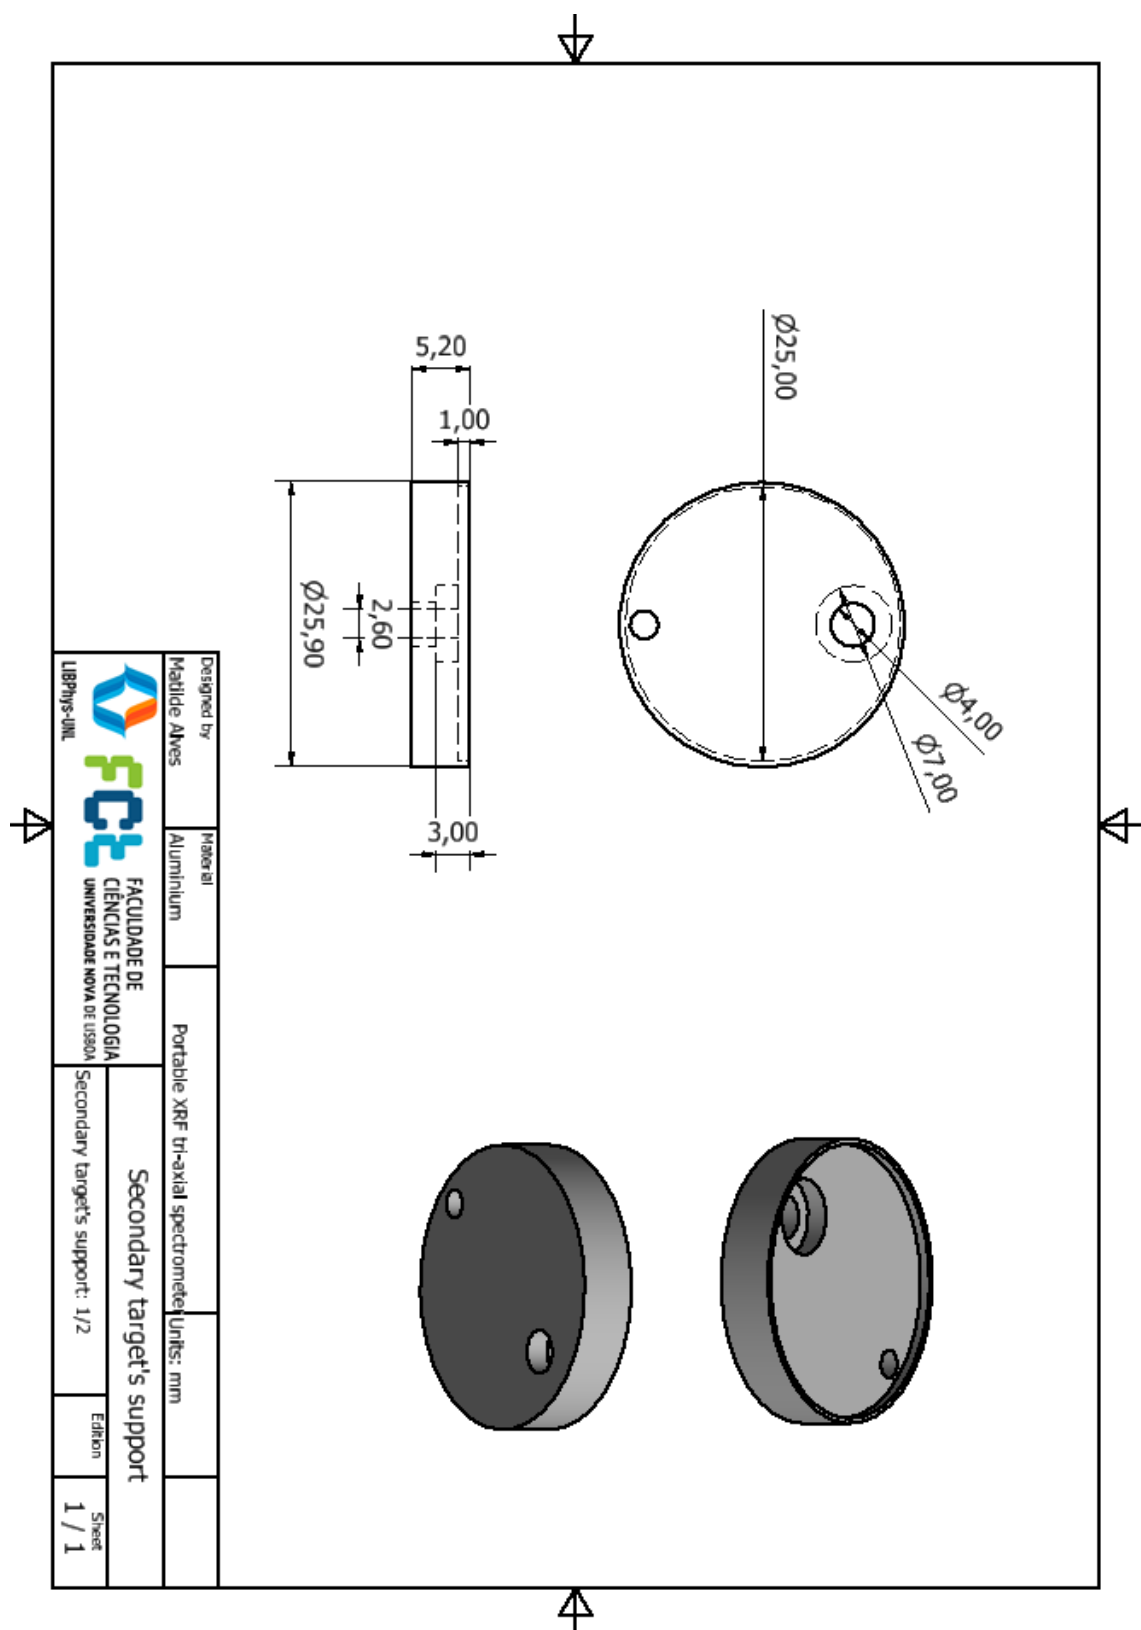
Secondary target's support 1/2 - Technical Drawing
